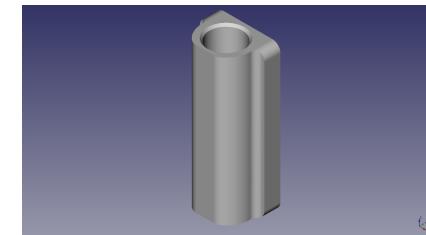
Begonia 3D Printed Double Bearing Holder Render
